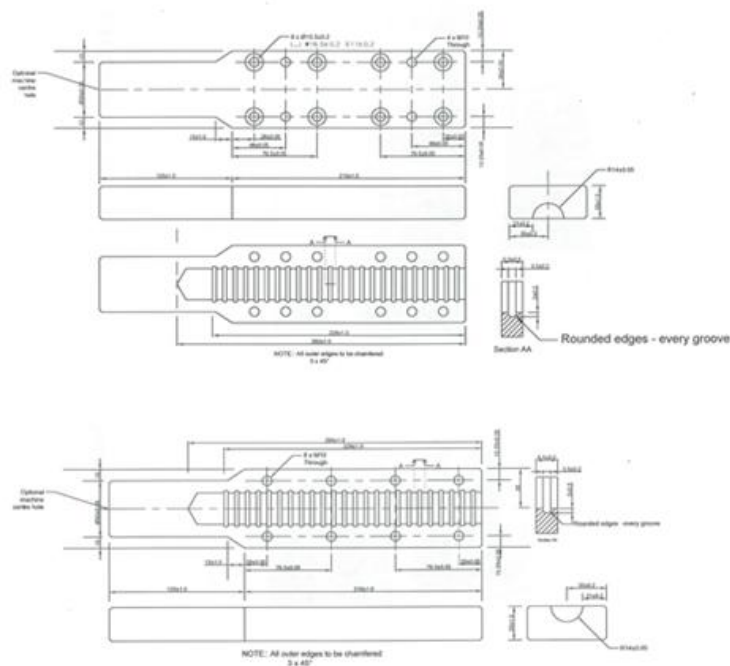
Detailed drawing of Minova axially split SEPT assembly.
